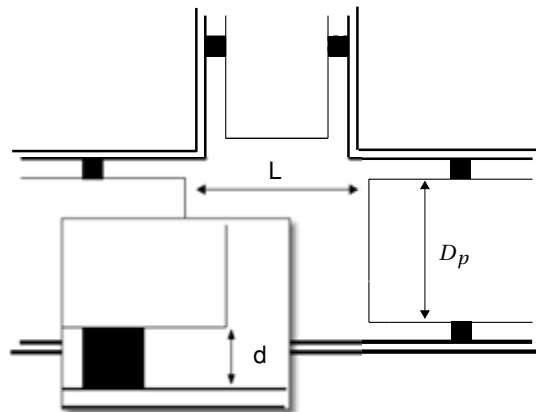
Schematic drawing of the inside of a T-joint - the bottom part is magnified
